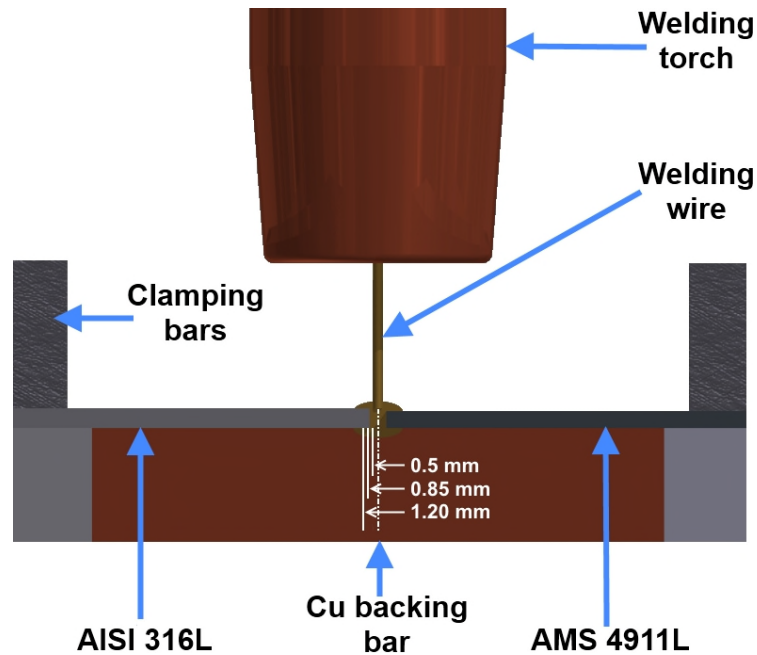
Welding wire positioning during the welding-brazing experiments
